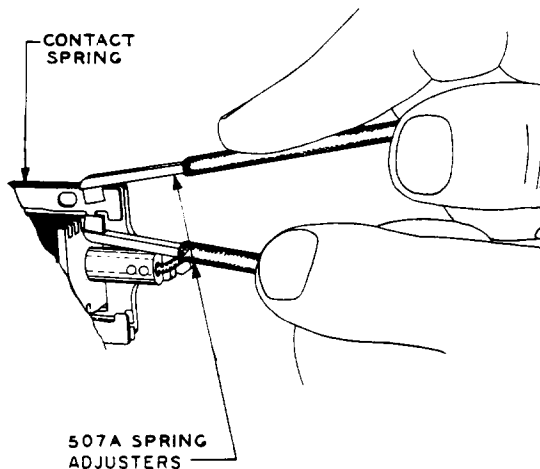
Fig. U – Method of Adjusting Spring Tang on 271- and 282-Type Relays
